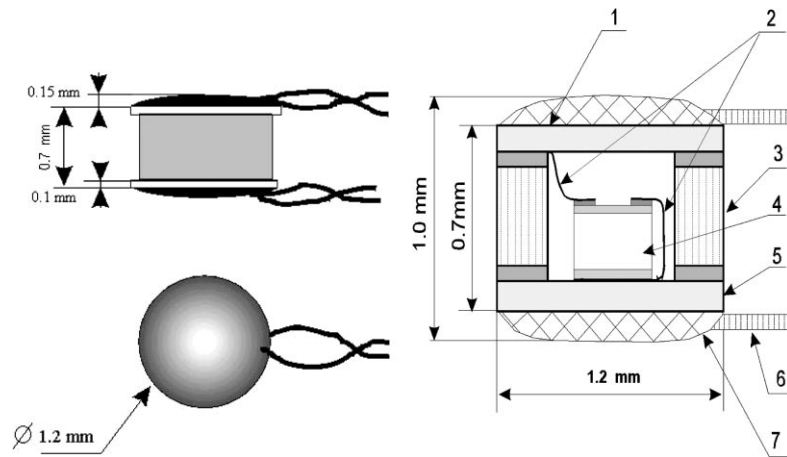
Design and dimensions of thermometer — (1) and (5): copper discs; (2): gold strip; (3): corundum cylinder; (4): sensitive element; (6): copper wire; (7): tin.
